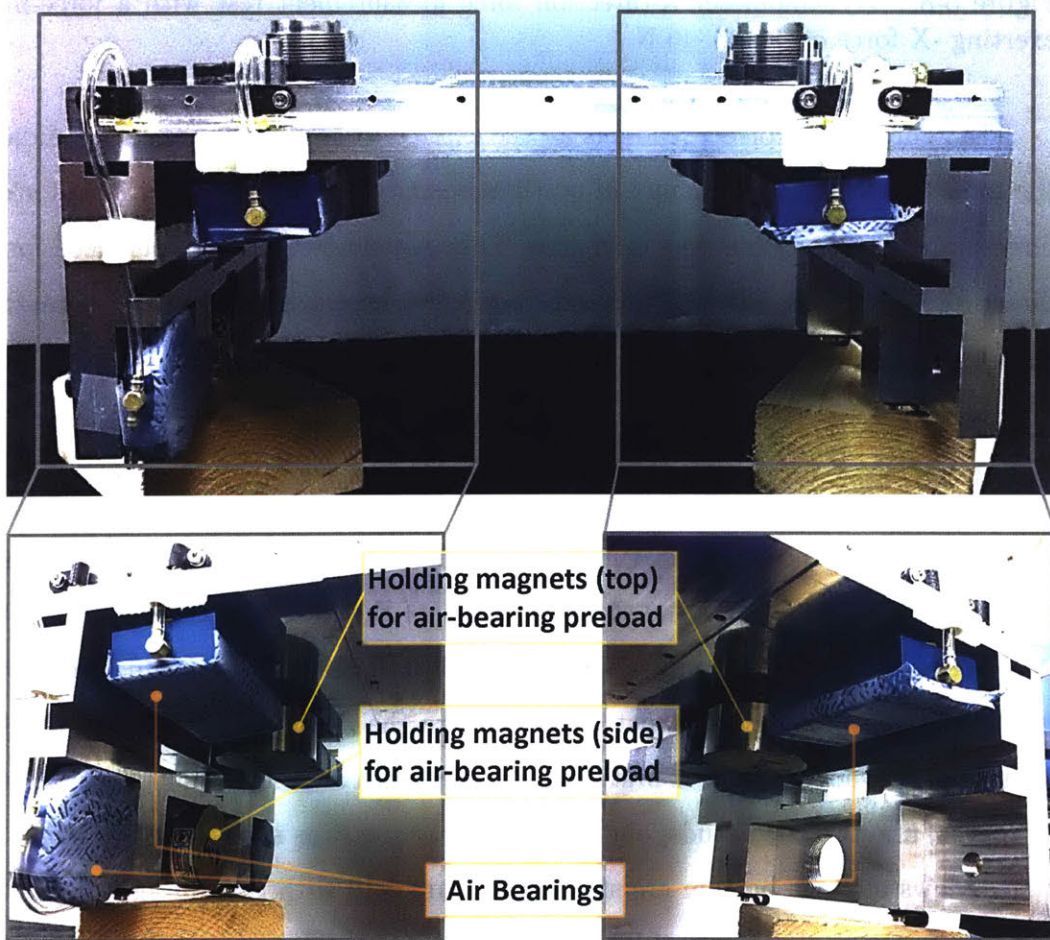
Detailed bottom views of the pre-assembled moving stage before being installed on the base guide bar. Patterned material protects face of air bearings, and is removed before operation.
